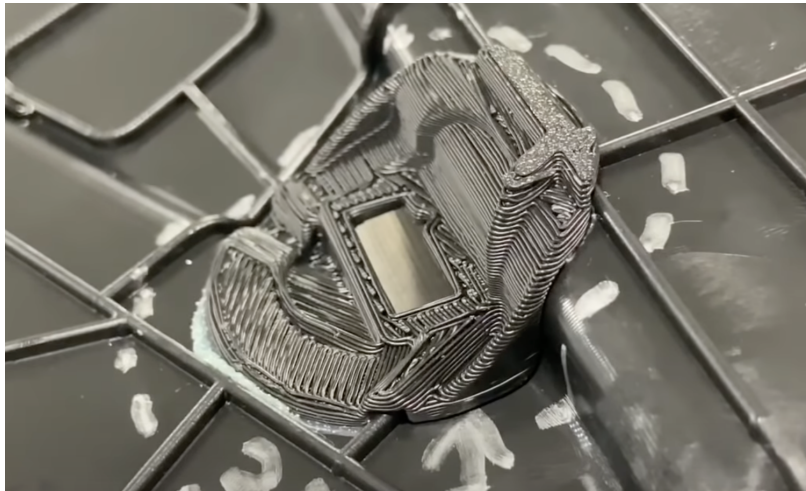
3D printed part in early Tesla Model Y HVAC units[10]
